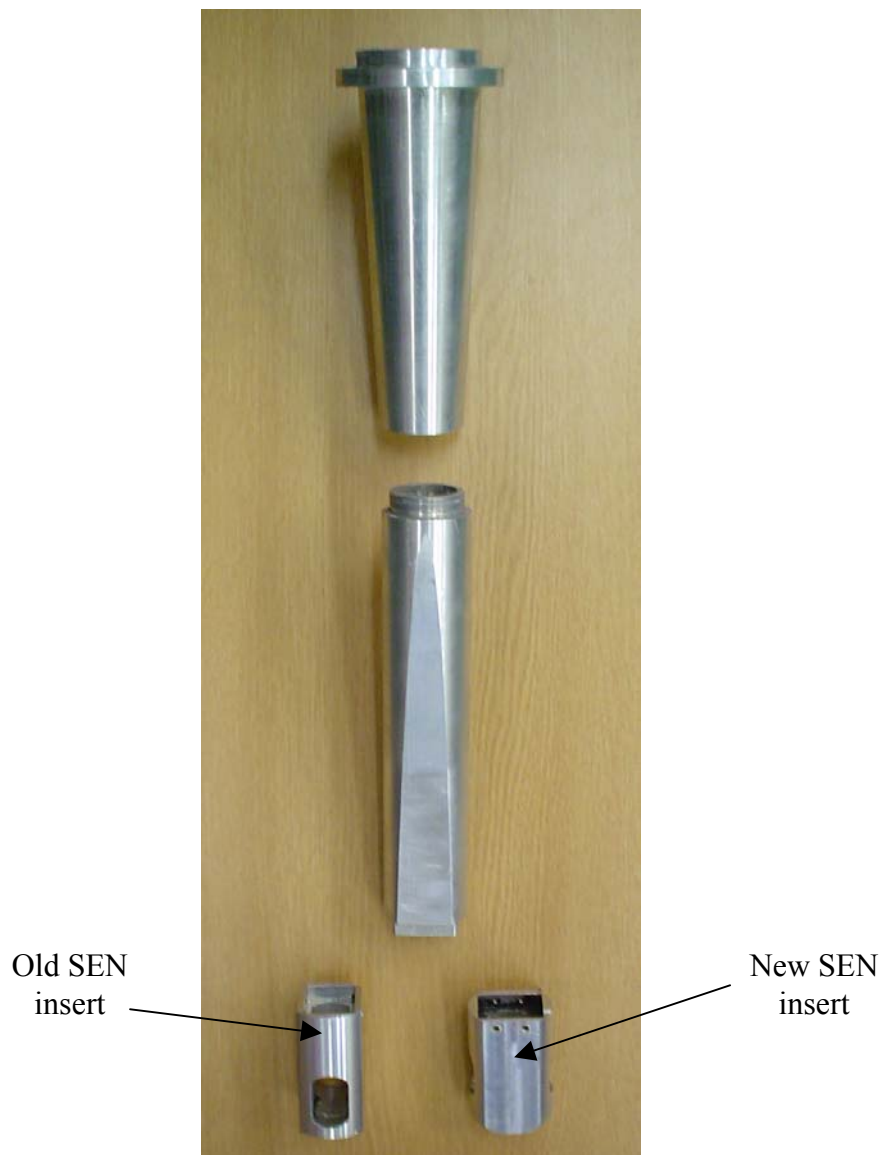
Aluminium SEN (3 different parts) shown in exploded view
